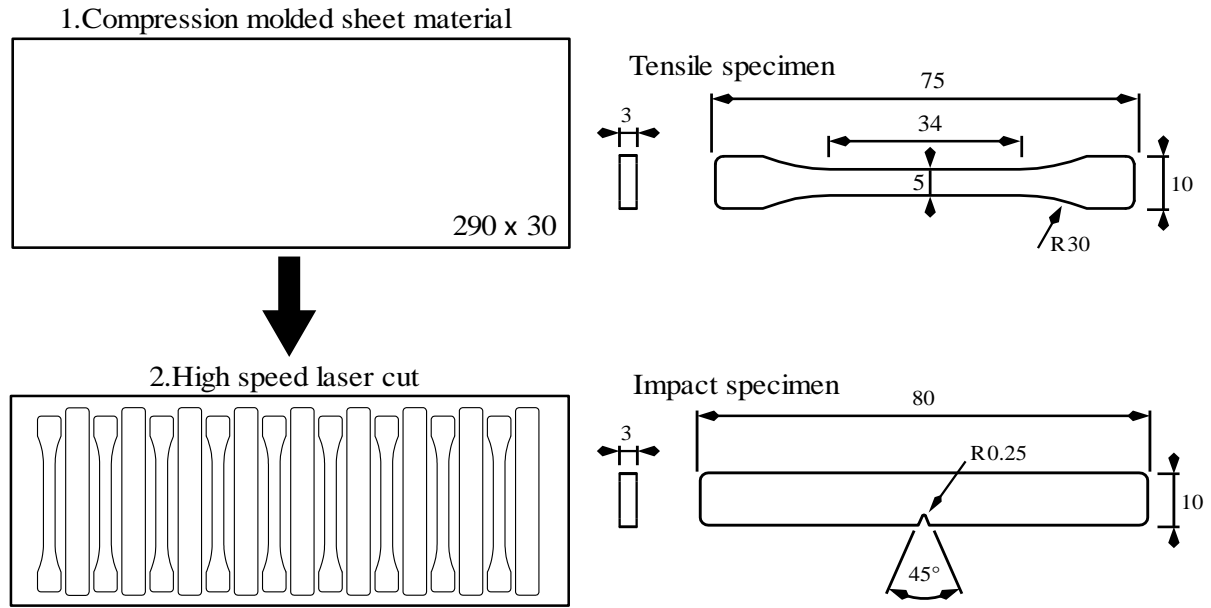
Specimen preparation through 1. compression molding and 2. laser cut, and tensile / impact specimen dimensions in mm.
